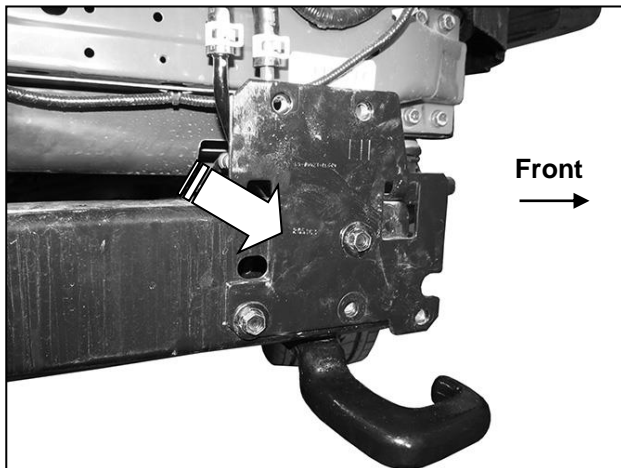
Remove hex bolts (1 per side) attaching outer bumper bracket to end of frame crossmember (arrow). Passenger/right side pictured from below bumper
